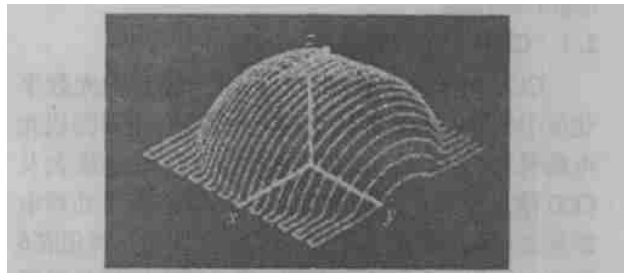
Outline drawing of laser digitizing collecting tee joint
